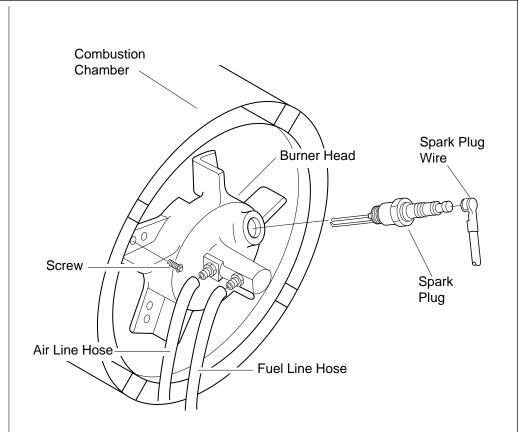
Removing Burner Head, 20,5/26,4 kW (70/90,000 Btu/Hr) Models
